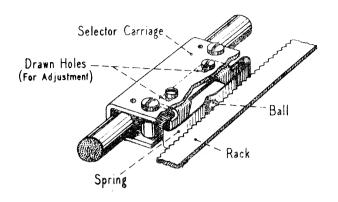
SELECTOR CARRIAGE-LOCATING DEVICE
